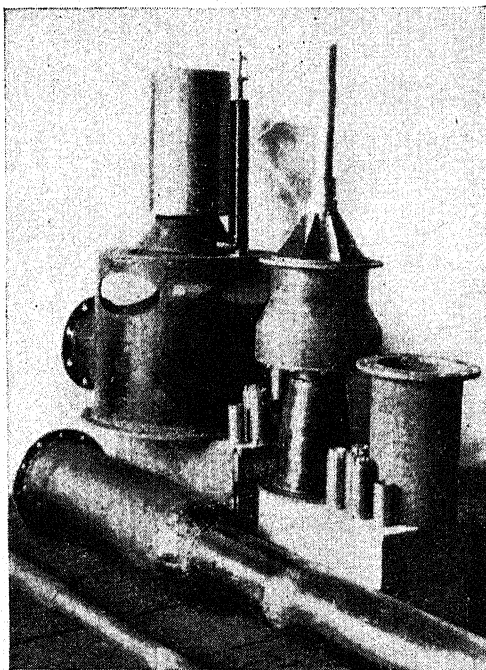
Welded 12-inch deep-well turbine pump.
